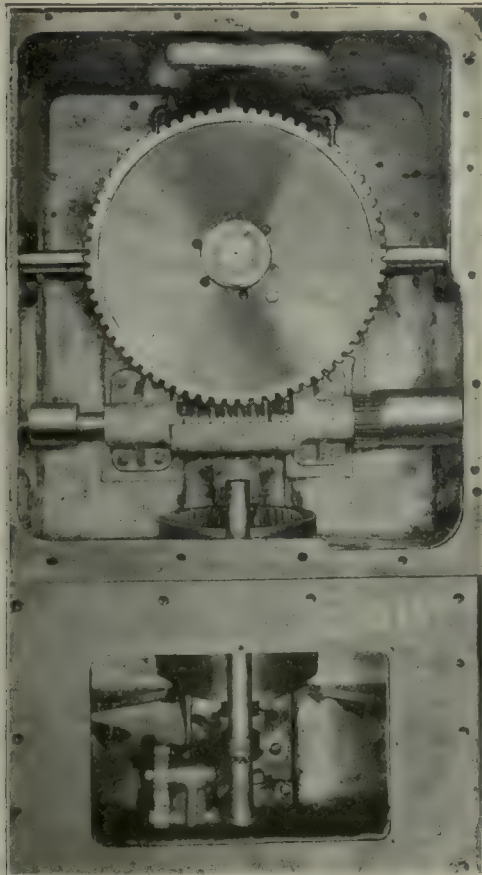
DRIVE GEARING FOR FEED MECHANISM OF SIDE SPINDLES
